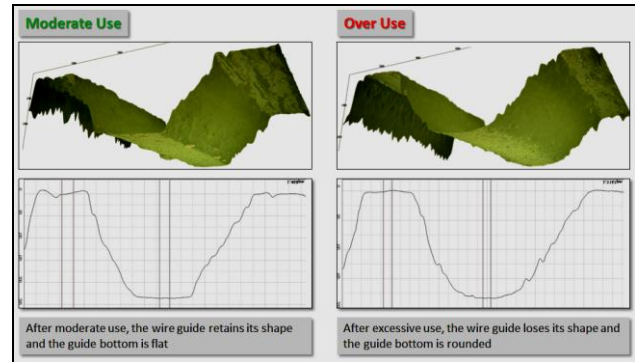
Monitoring wire guide wear on a wafer slicing machine.
